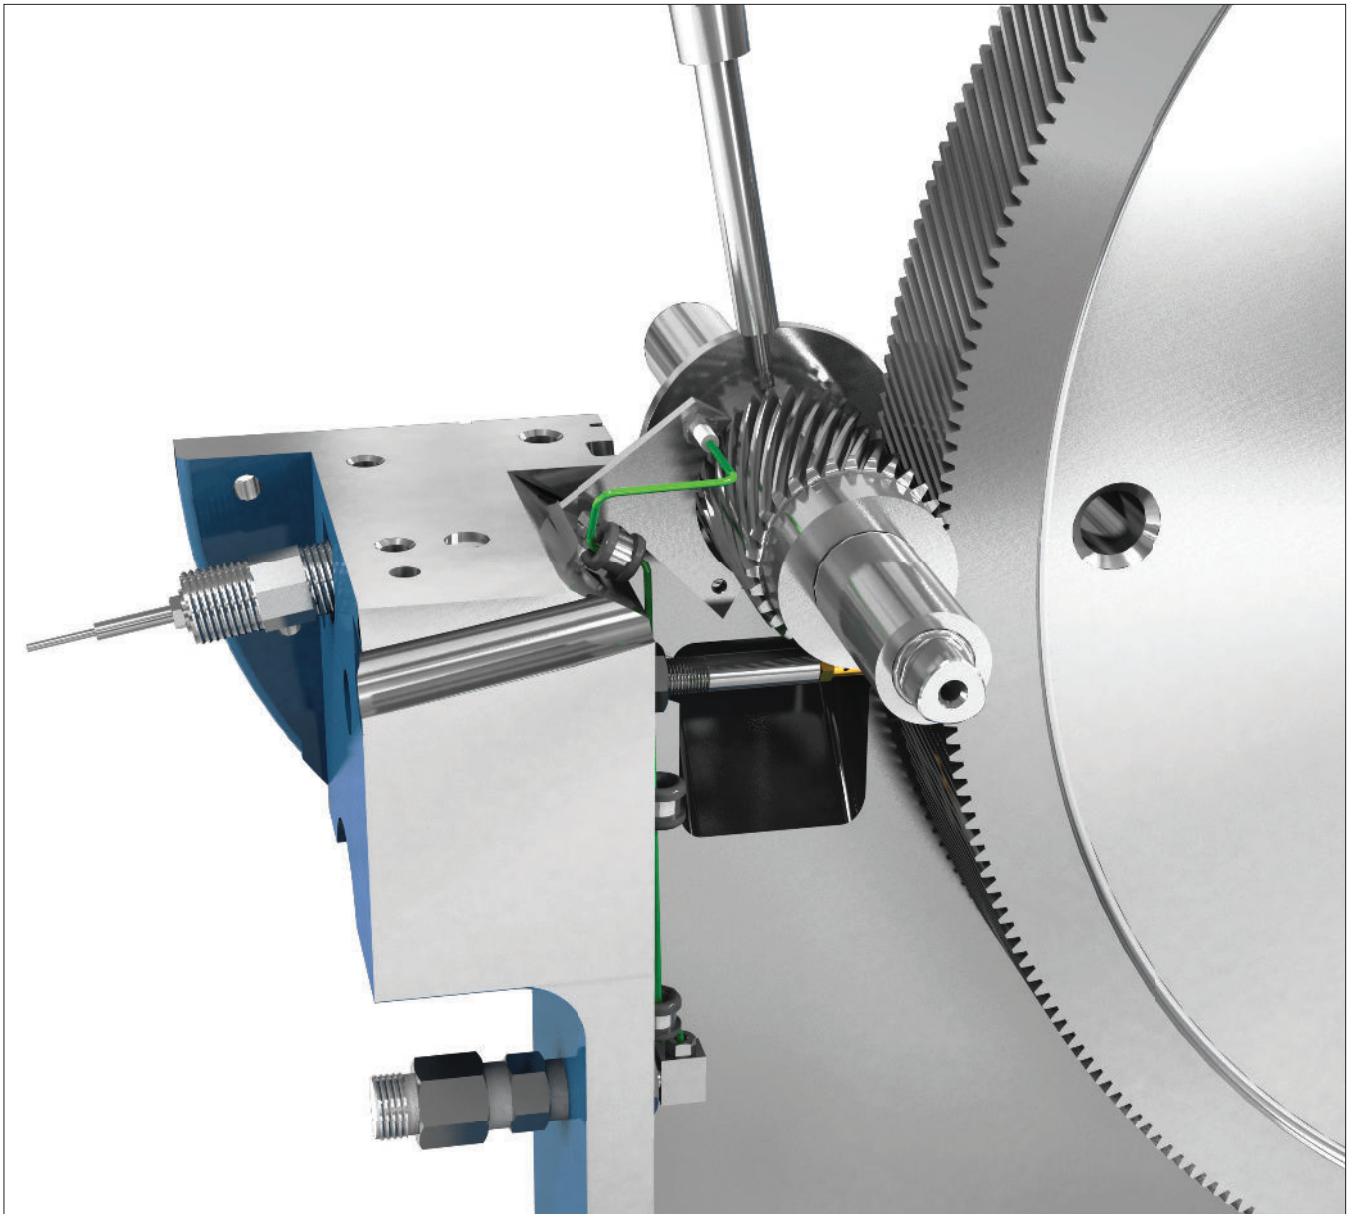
Axial displacement probe installation arrangement for two-stage rotor configuration. Note: Impellers have been removed to provide a better view of the package assembly.
